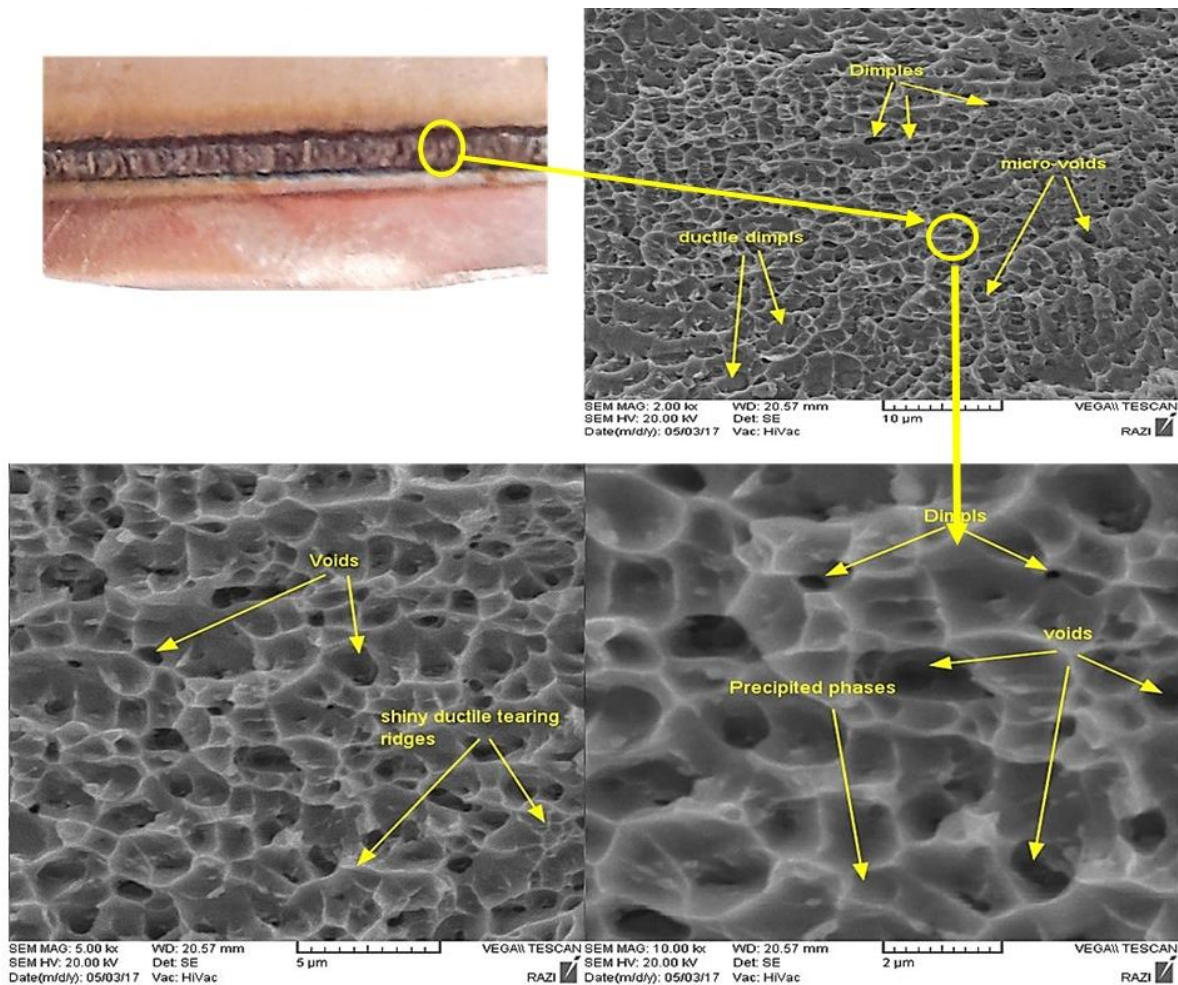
Fracture surface of the laser welded sample with medium heat input.
